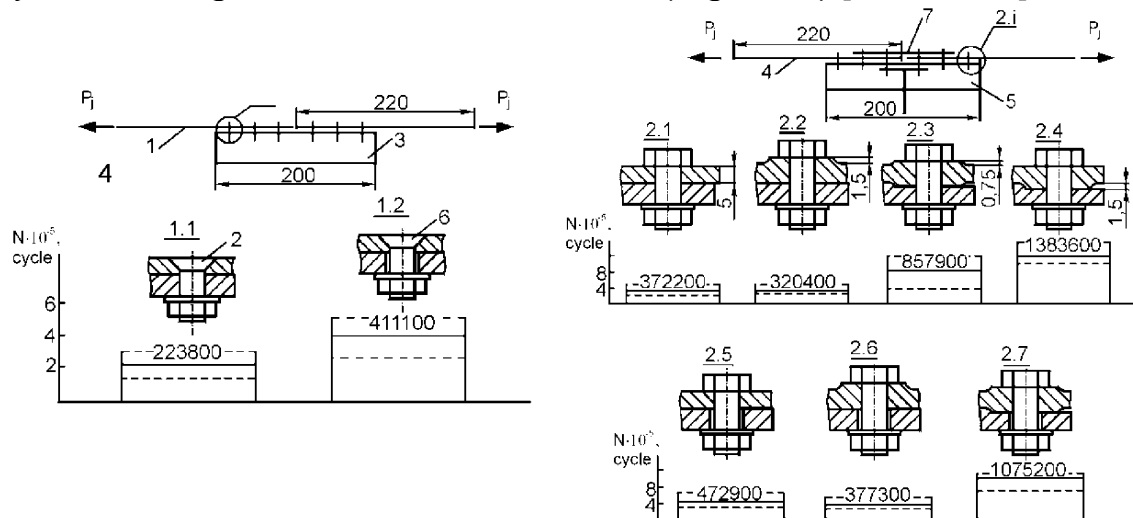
Rigid Section. Joint Test Pieces: 1 – D16AT15 steel plate; 2 – bolt 5015-8-25; 3, 5 – section D16T-Pr315-7; 4 – plate D16T; 6 – bolt with three-cones countersunk head; 7 – splice plate
